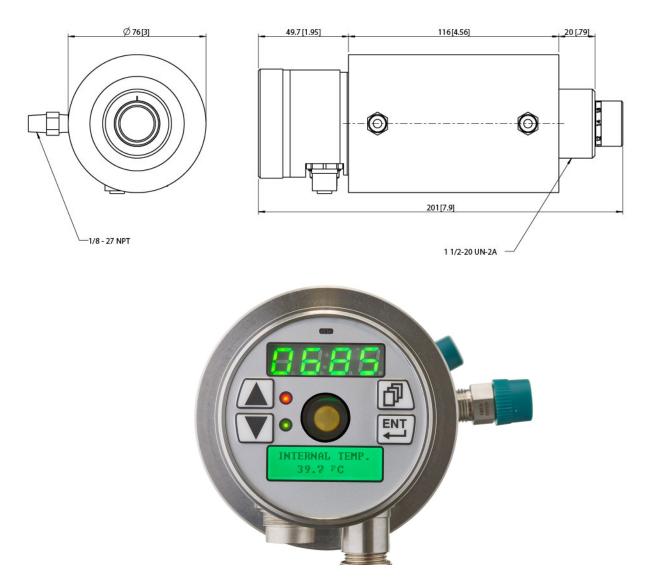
Endurance Head with Air/Water-Cooled Housing Option
